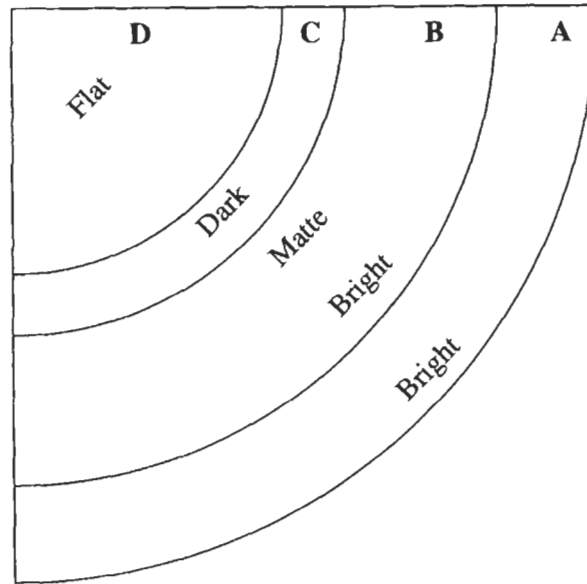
Schematic illustration of the shaft fracture surface.
